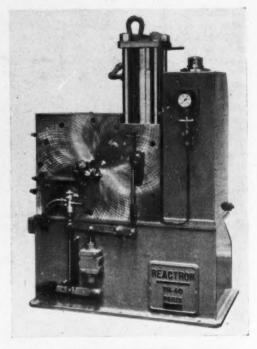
Front view of the Reactron type T40 bar shearing machine
